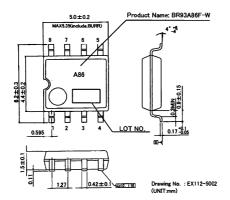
(a) PHYSICAL DIMENSION SOP8 (BR93A86F-W)
